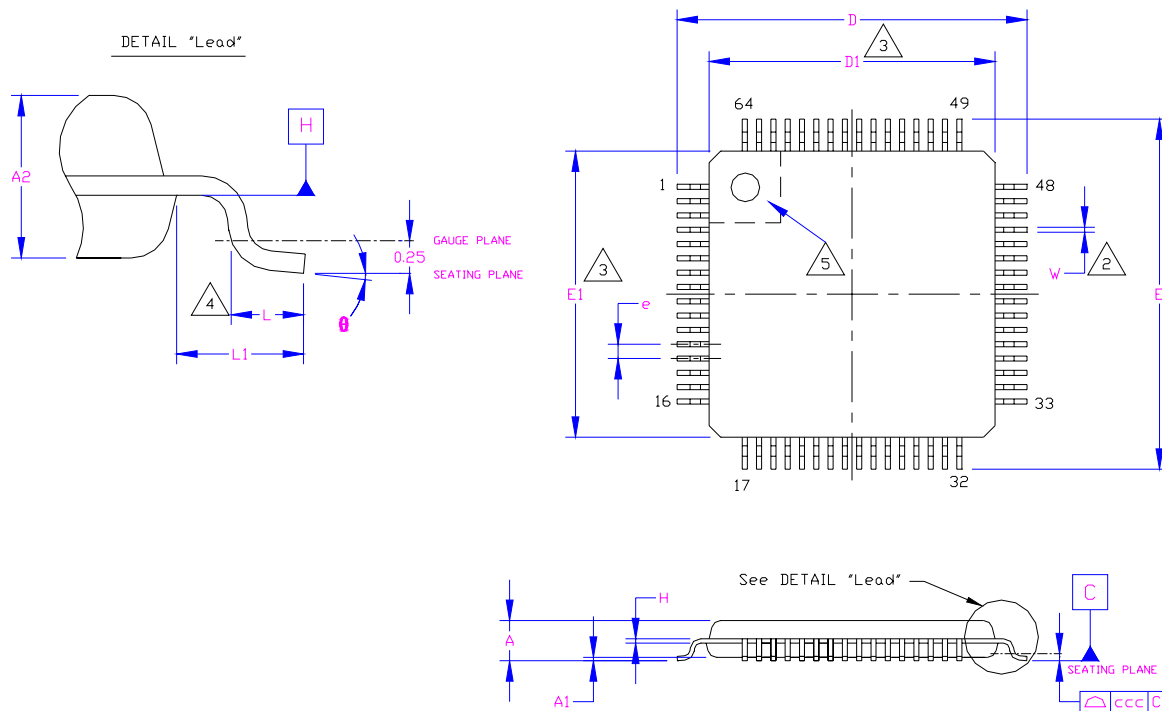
64 Pin STQFP Package Outline, 7X7X1.4 Body, 2 MM Footprint
